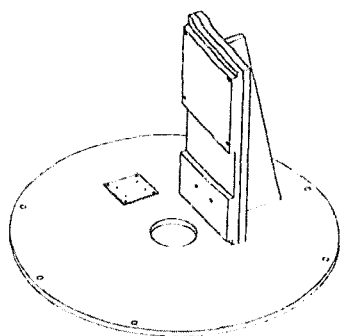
Assembly of the camera system and gyro-stabilized mount using the jig.
